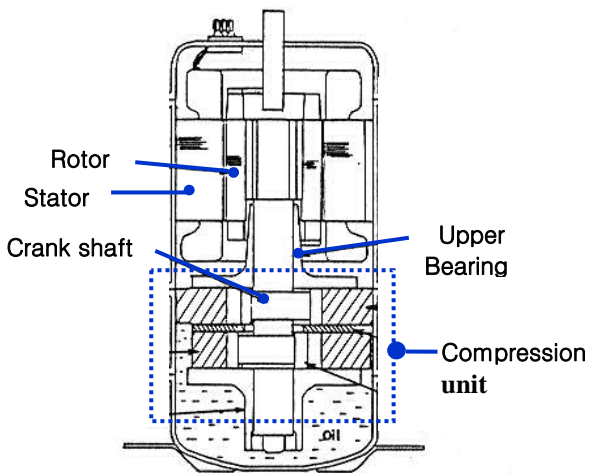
Cross-sectional view of the BLDC rotary compressor
